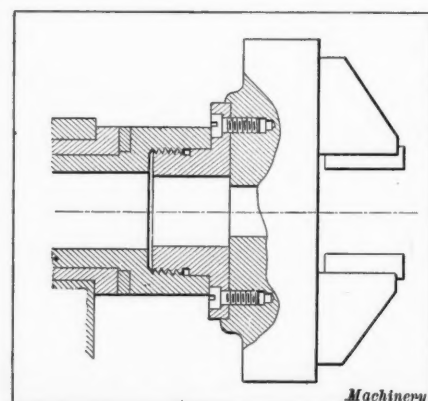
Chuck with Adapter fitted to Inside of Spindle Nose
